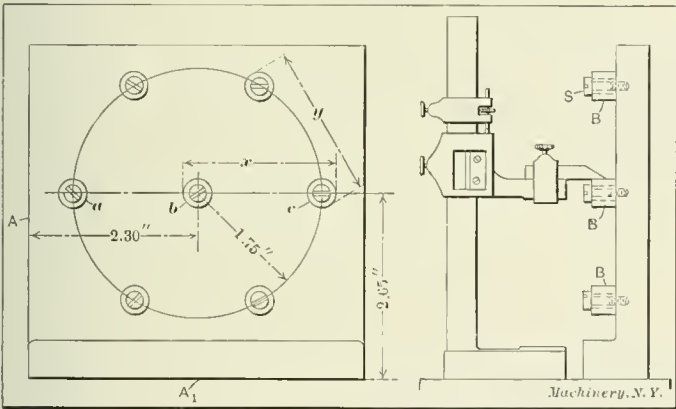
Jig-plate with Buttons attached, ready for Boring
